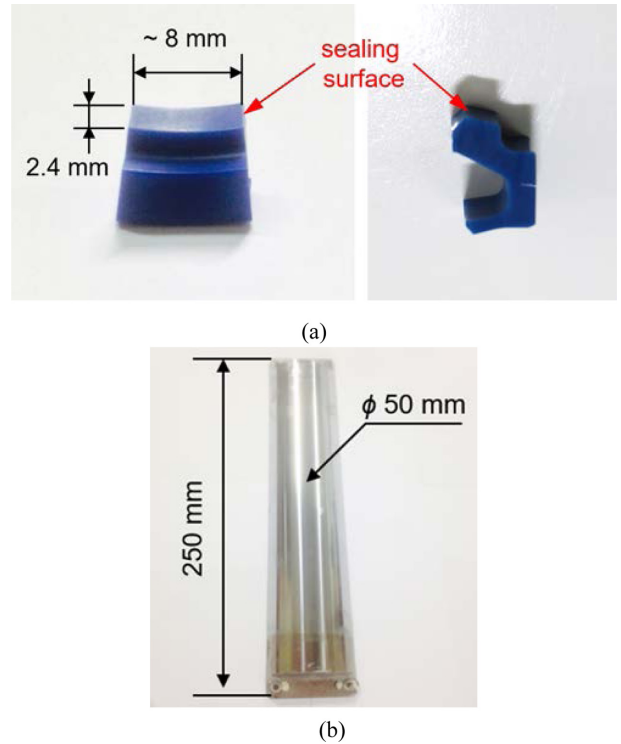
Photographs of (a) PU and (b) stainless steel cylinder specimens
